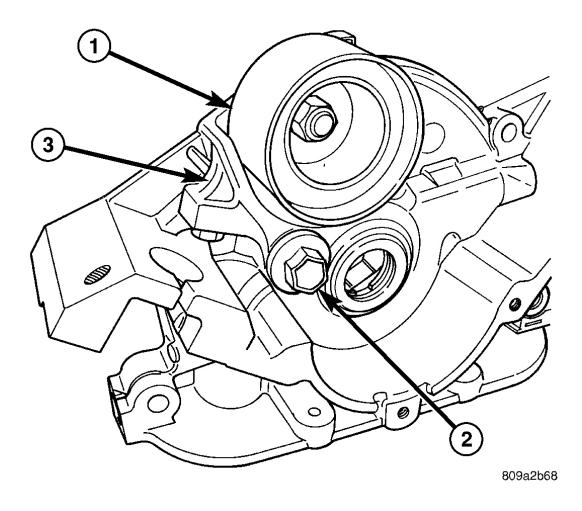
Removing/Installing Tensioner Pulley, Pivot Bolt & Tensioner Bracket Courtesy of CHRYSLER LLC
